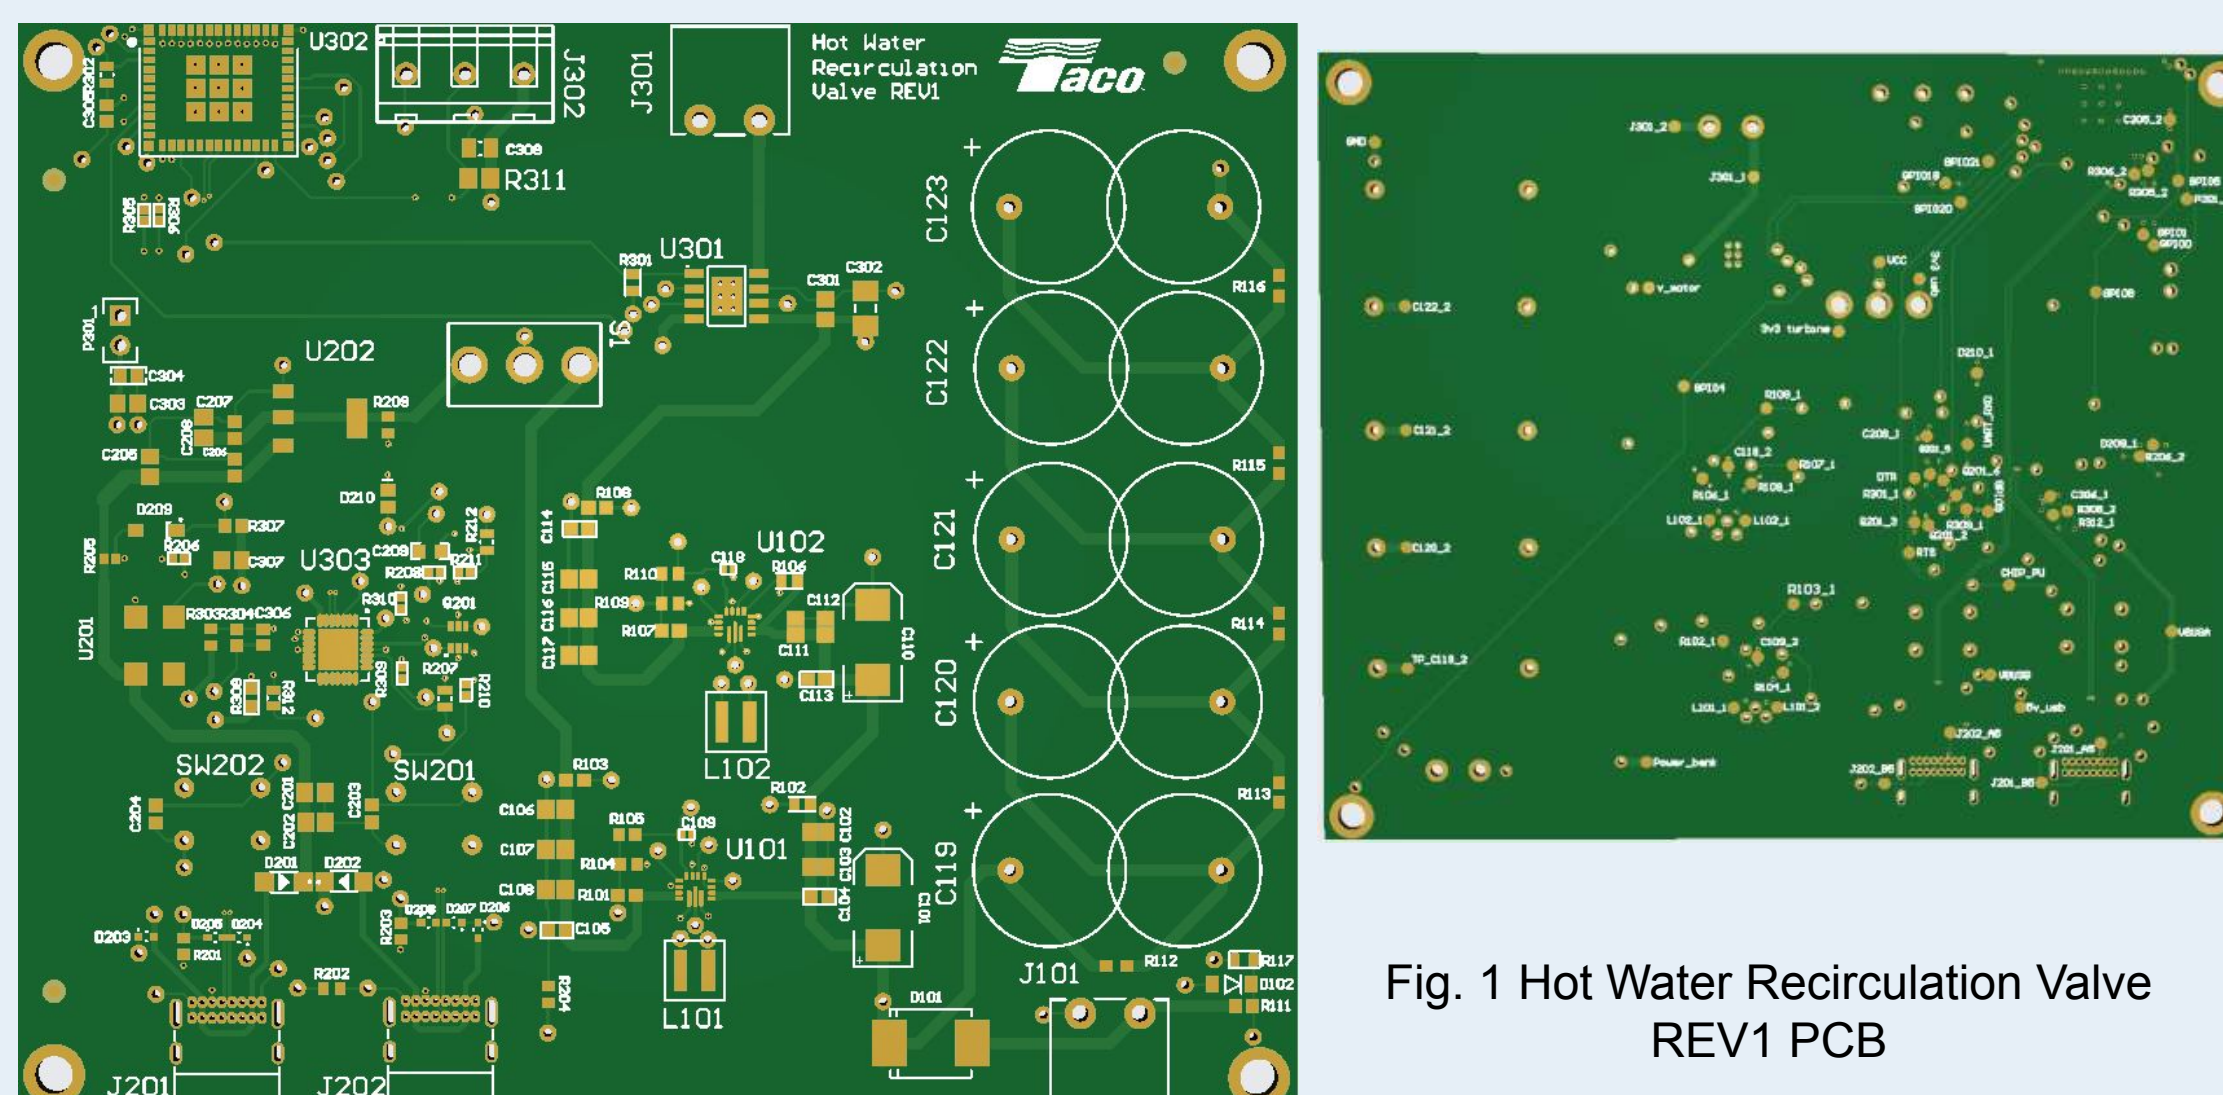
Hot Water Recirculation Valve REV1 PCB
